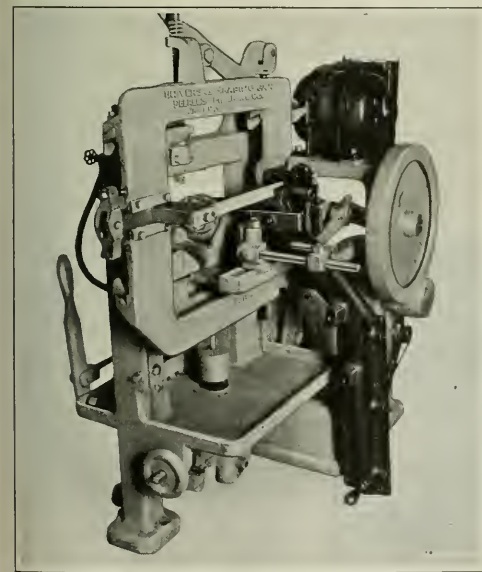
Universal Shaping Saw manufactured by the Peerless Machine Co.
